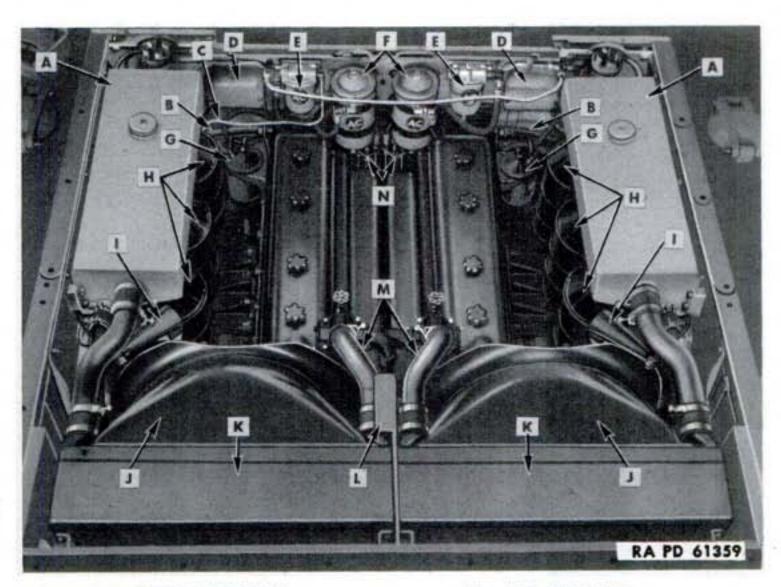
Flywheel End of Power Unit with Bulkhead Opening Covers Removed
